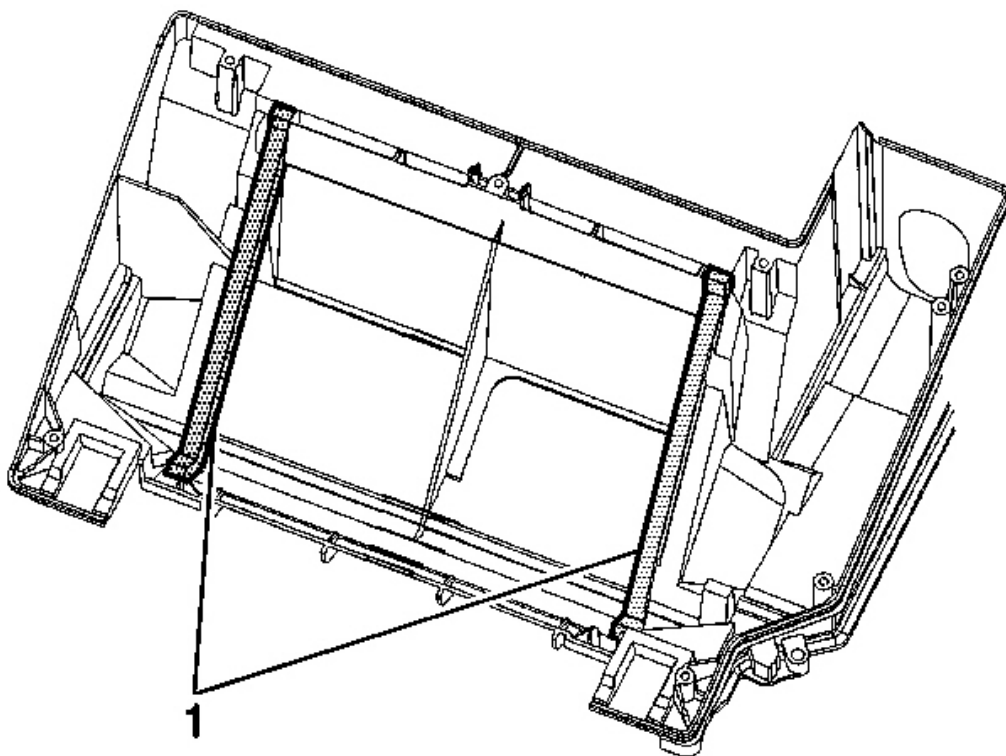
Lower HVAC Module Case & Heater Core Side Seal
